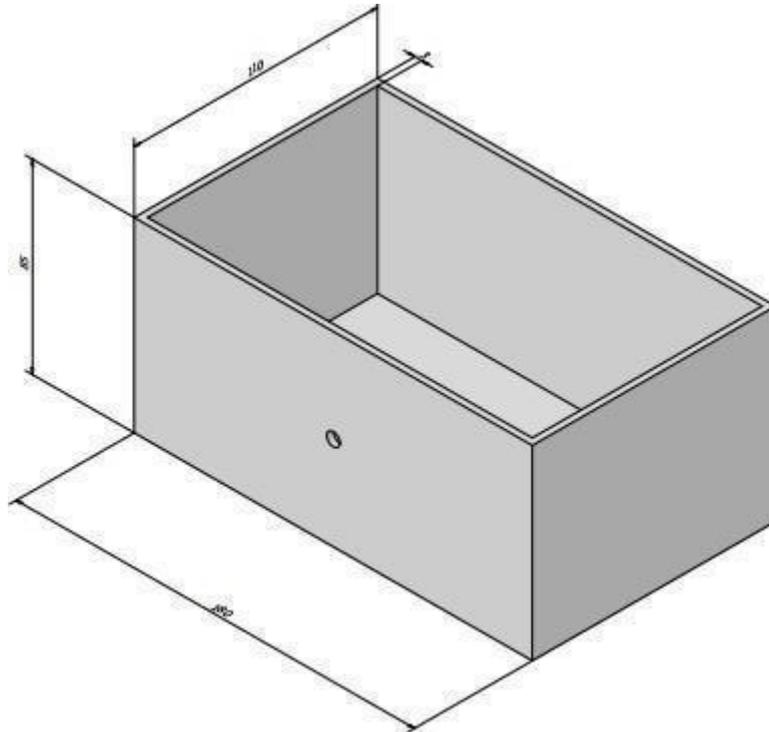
Isometric View Of Aeroscout Thermovision
